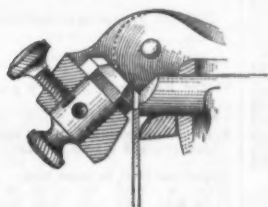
Section through Head of Taintor Saw Set, Showing Punch Clamping the Saw Tooth Against Anvil.
